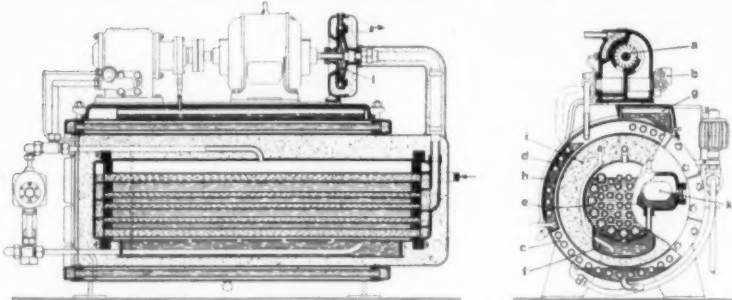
Section through a 22,000-B.t.u. Sulzer machine, showing the brine cooler inside of, and insulated from, the condenser. Key to end section: a—compressor, b—ejector, c—condenser, d—oil separator, e—evaporator, f—oil tank, g—oil collector, h—oil cooler, i—insulation, k—float regulator, l—brine circulation pump.
